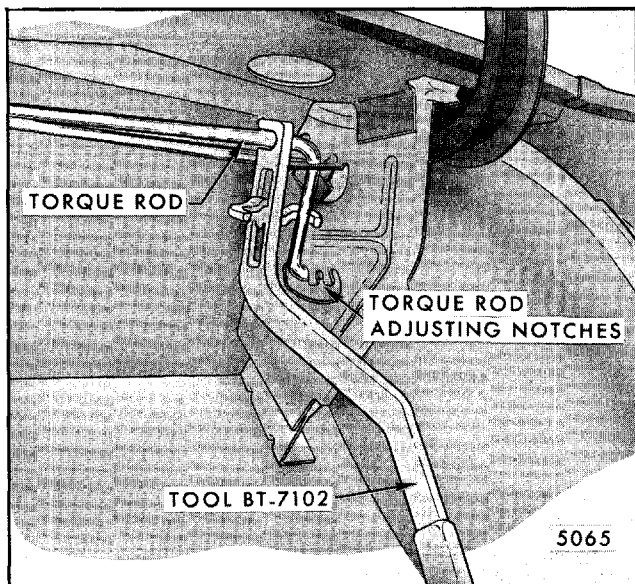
Rear Compartment Torque Rod Adjustment - Oldsmobile "E" Styles.
